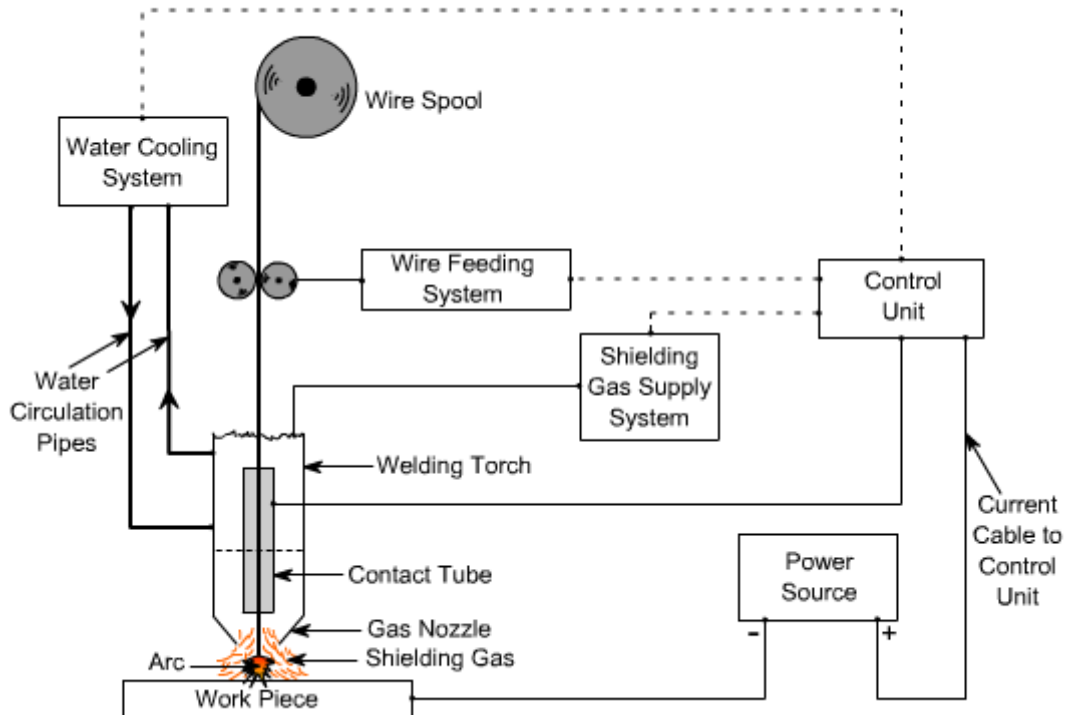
Schematic Diagram of GMA Welding
